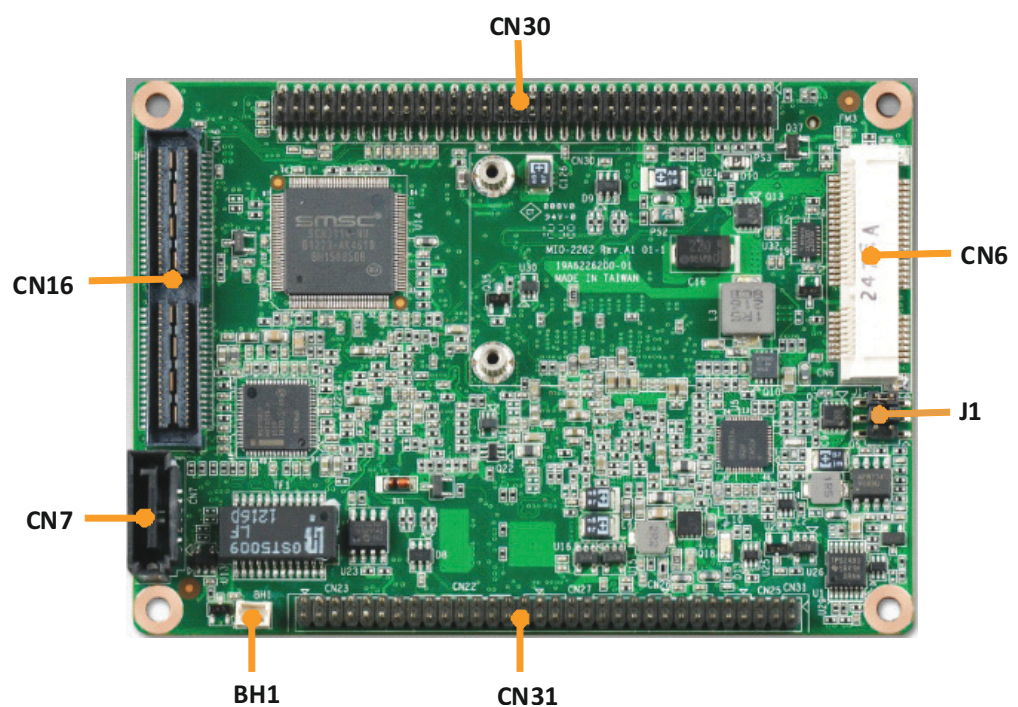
Jumper and Connector Layout (Bottom Side)
